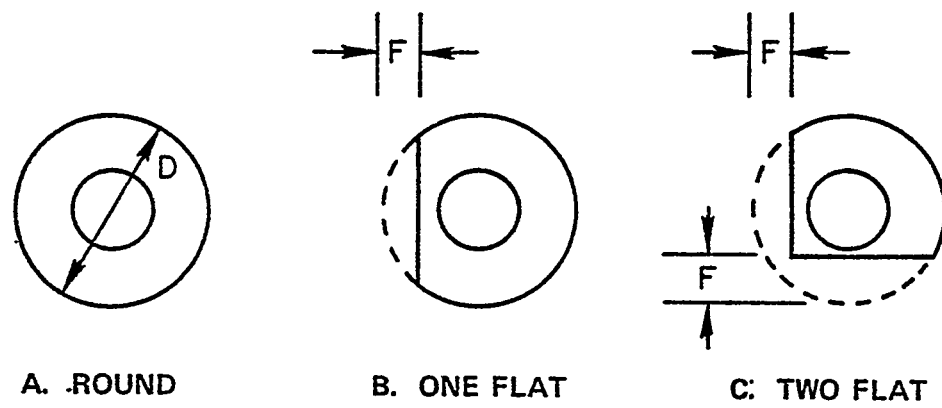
SPECIMEN USED FOR FIRECRACKER WELDING STUDIES
